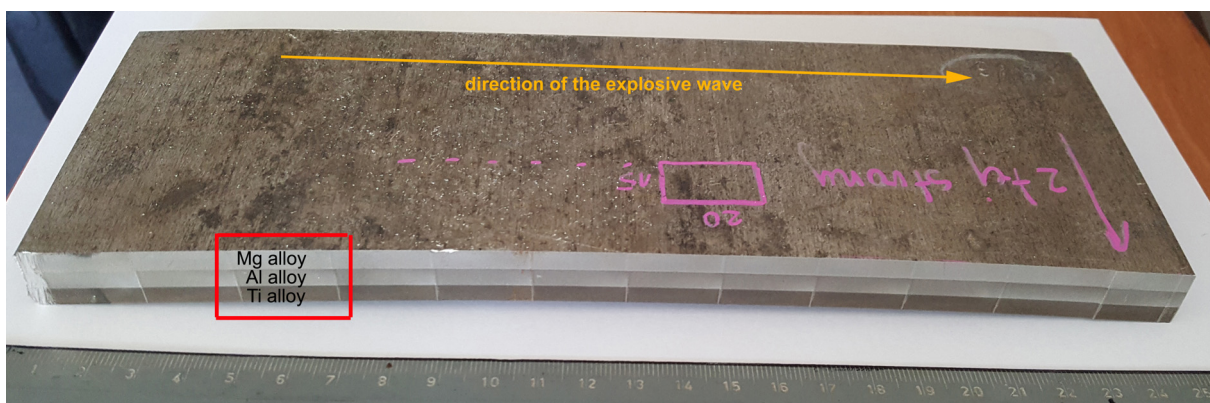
A view of the multi-layer plate after the explosive welding
